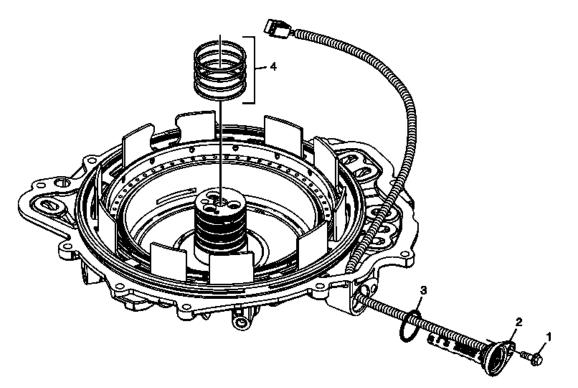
Identifying 3-5 Reverse & 4-5-6 Clutch Housing Courtesy of GENERAL MOTORS COMPANY
